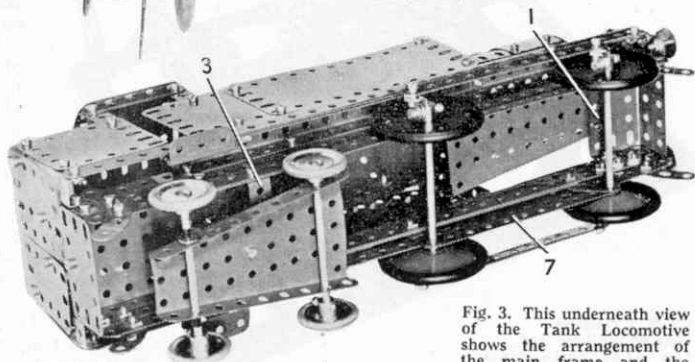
This underneath view of the Tank Locomotive shows the arrangement of the main frame and the axle bearings.
